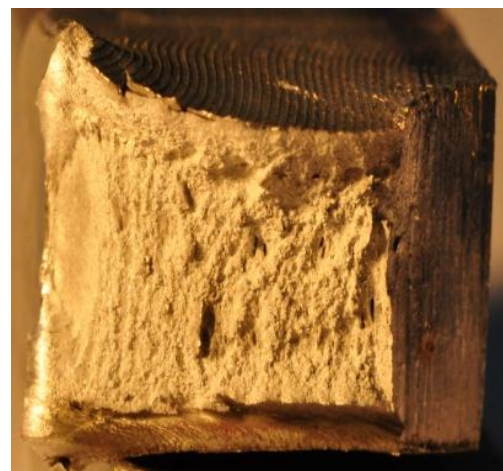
₂. Macrophoto. fracture (500rpm,100mm/min)
